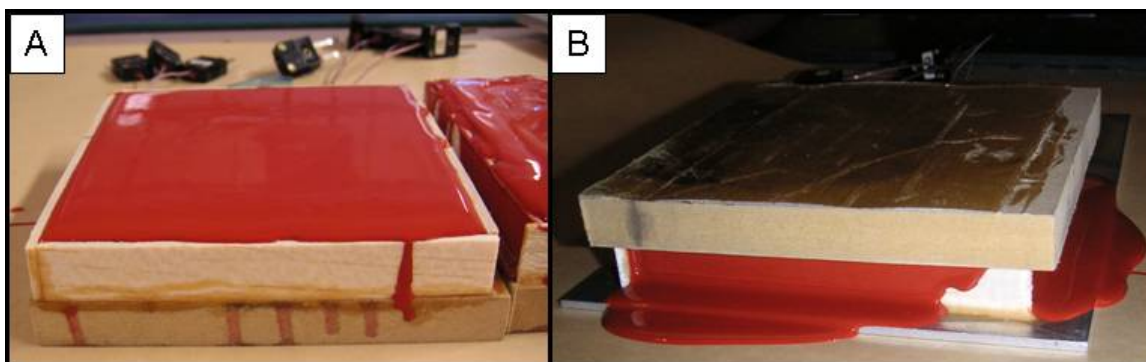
A) Mold filled with uncured liquid KE1204; B) Caul plate on top of mold to remove curvature created by surface tension.
